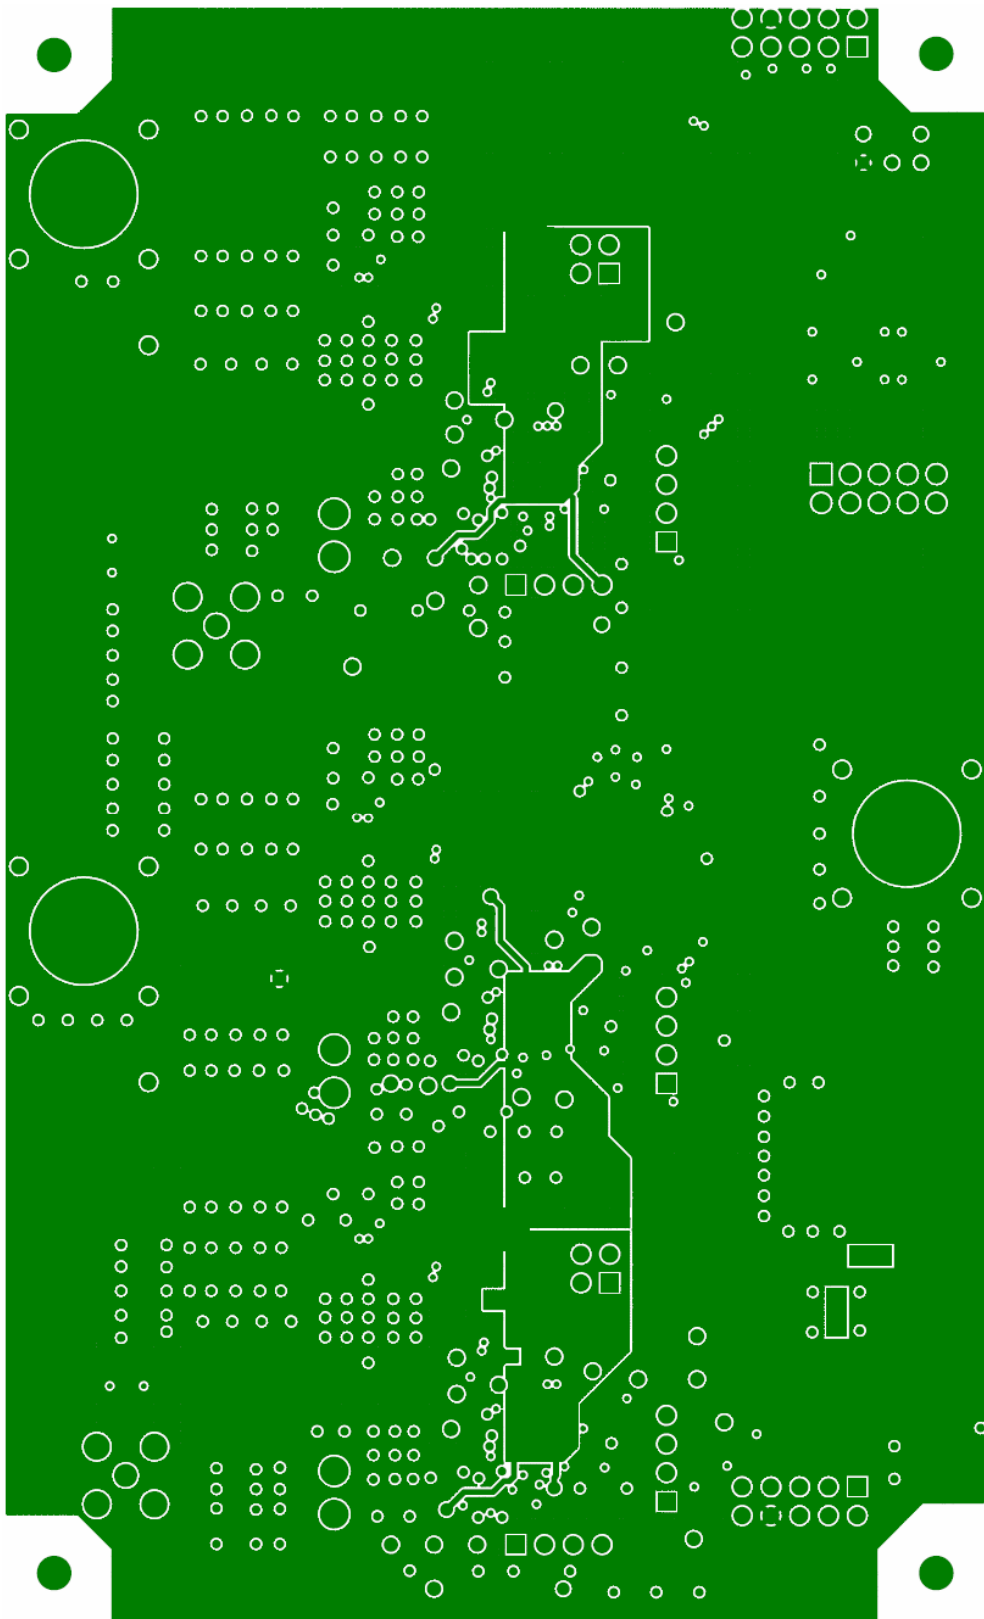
PCB – Inner Layer 1 (Viewed from Top)
